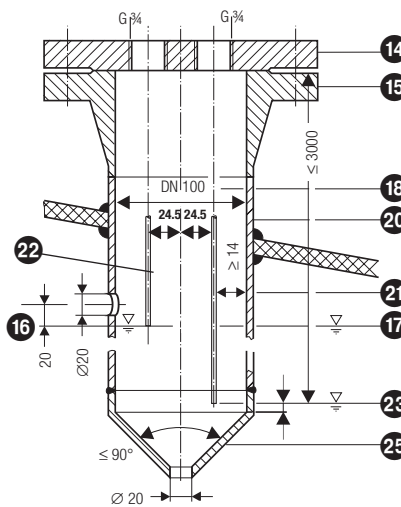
Protection tube (provided on site) for installation inside the boiler and in combination with other GESTRA equipment
